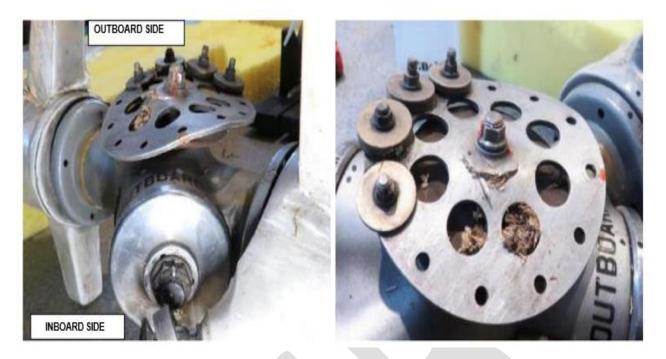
Details of the deformed balancing flange and the absence of the washer to be installed mating to it (Fig. 1).
